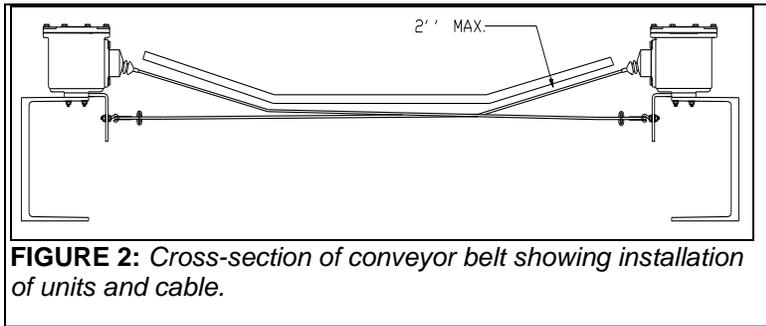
Cross-section of conveyor belt showing installation of units and cable.
